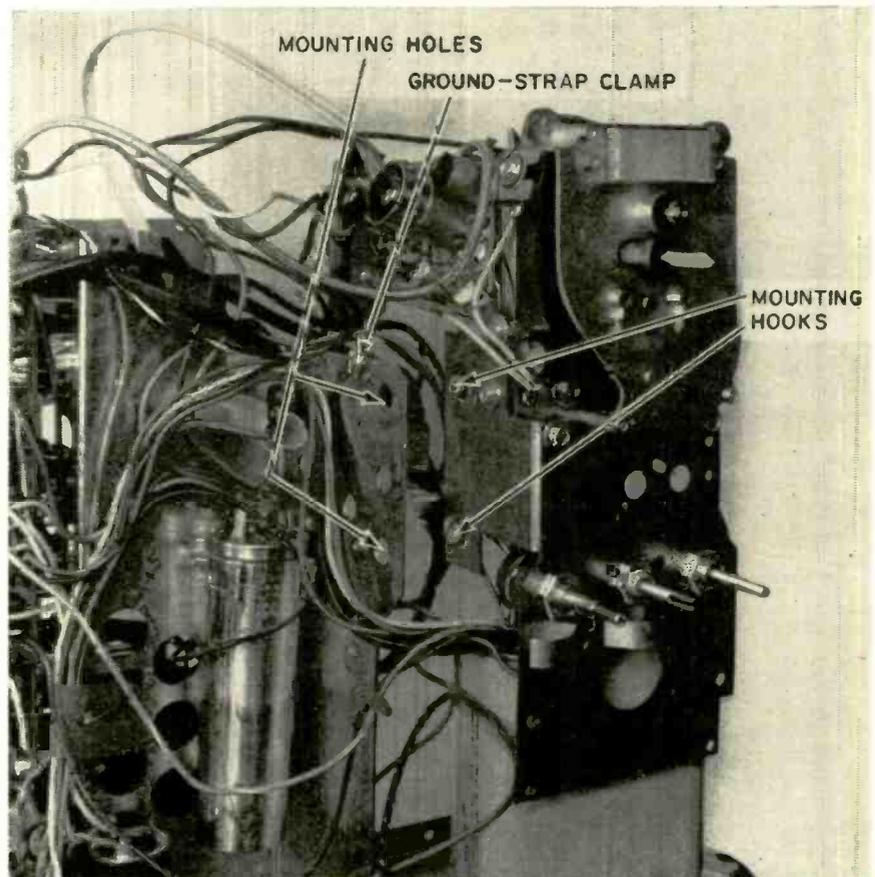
G-E tuner hooks onto chassis for easy transporting.
